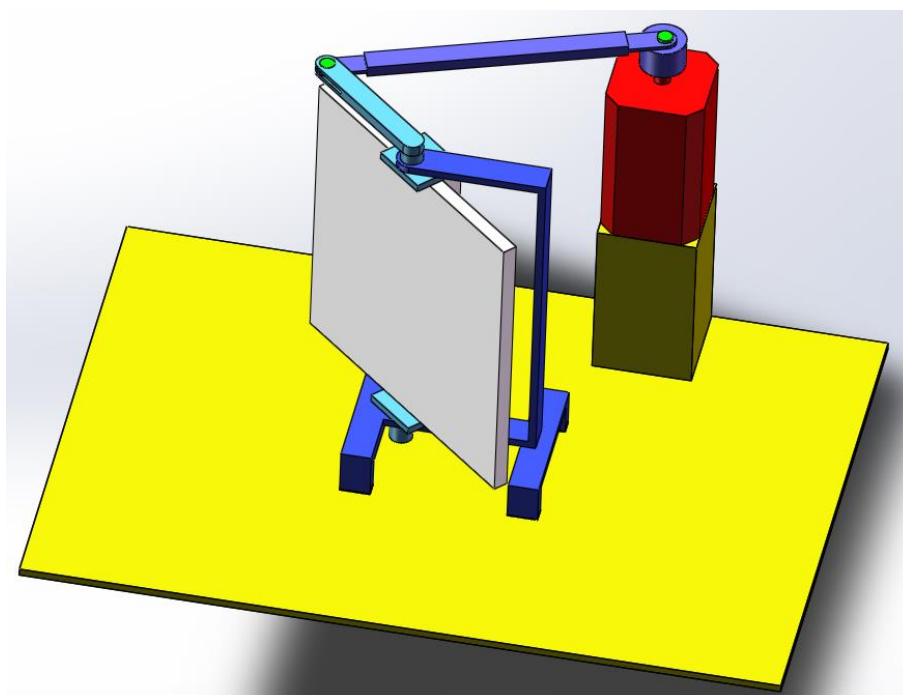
The rotated flat mirror model with crank rocker and the servo motor in Solidworks.
